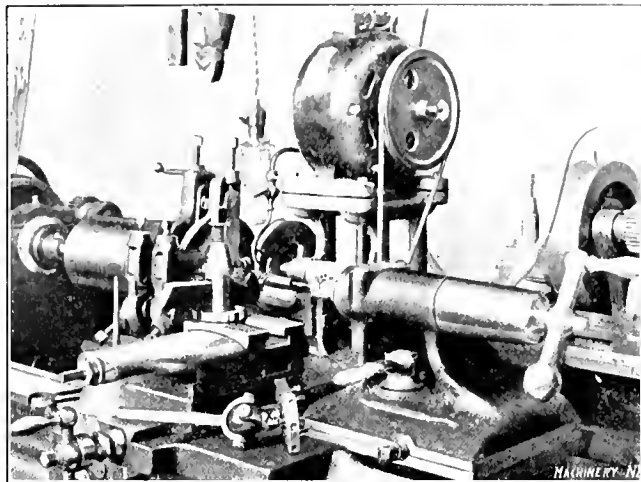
Finish Turning and Grinding the Bowl Spindles
